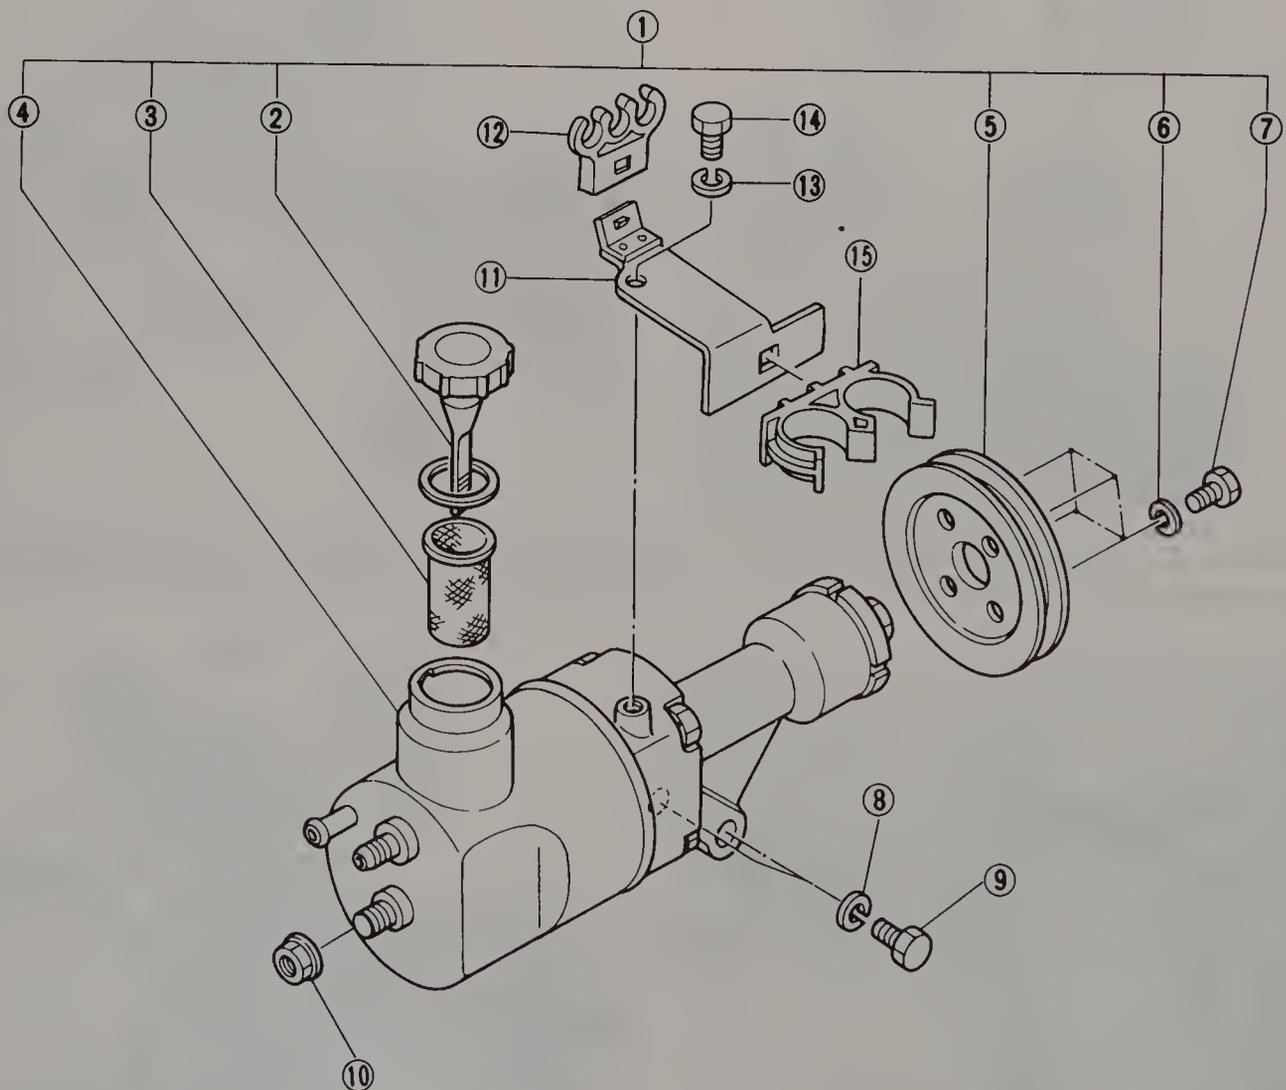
Power steering pump components – exploded view (Sec 22)
